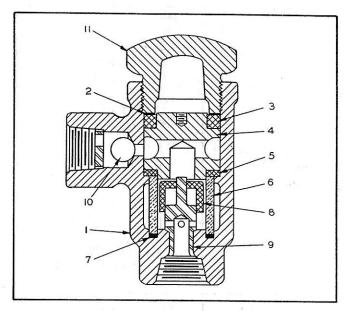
Oil Check Valve - 6" to 9" Compressors
